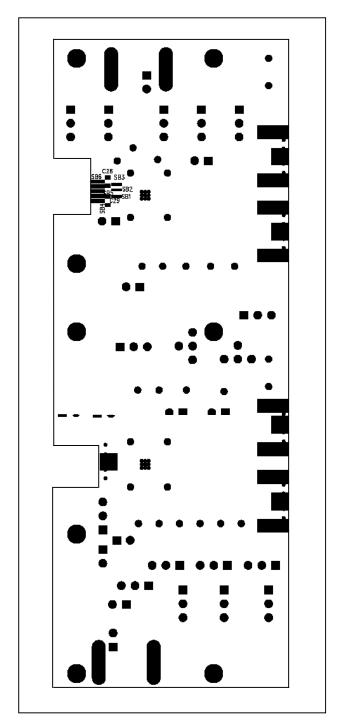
MAX3737 EV Kit PC Component Placement Guide—Solder Side
